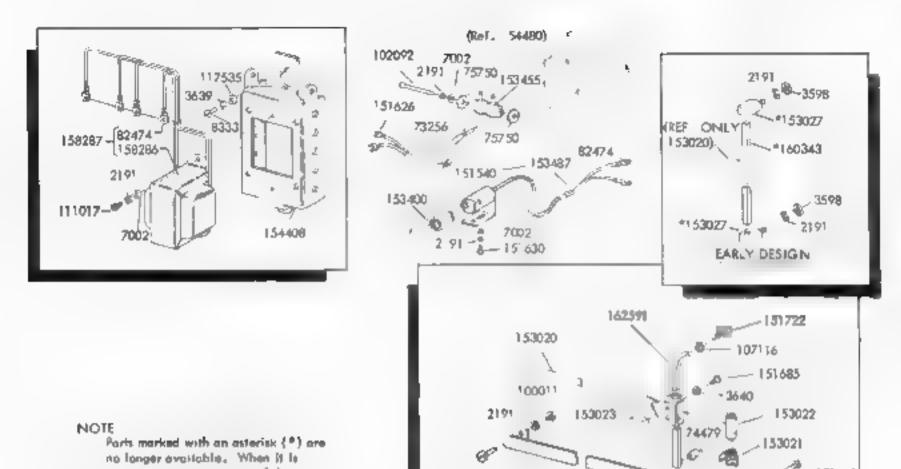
TRANSFORMER AND LINE GUIDE
